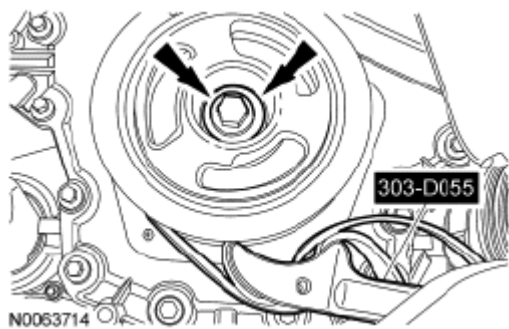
Locating Crankshaft Pulley Washer & Bolt
